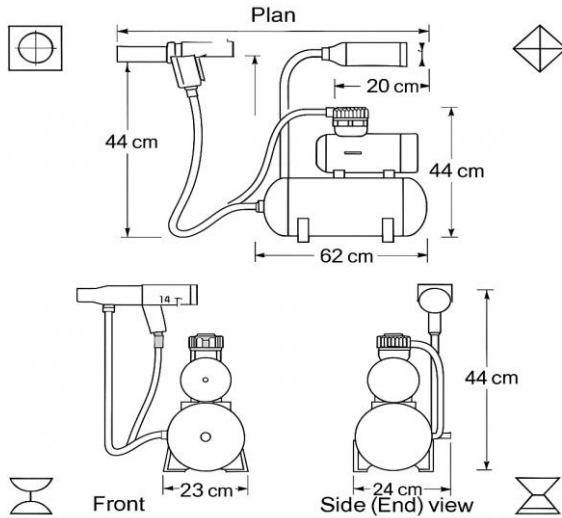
Third Angle Projection of Sandblasting Machine; Front view, Plan and End/Side view (CAD Design) with Spray Gun
